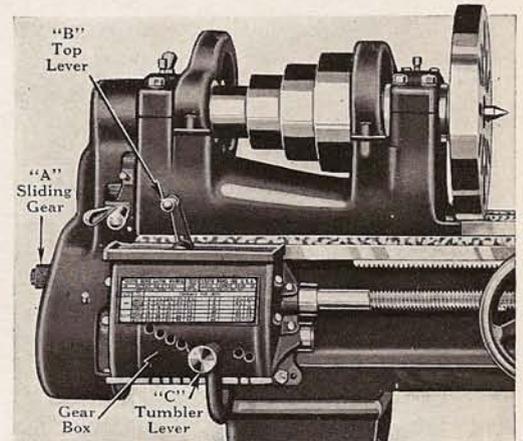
Quick Change Gear Mechanism used on all South Bend Quick Change Gear Lathes. (See Gear Box Description on Page 41)
